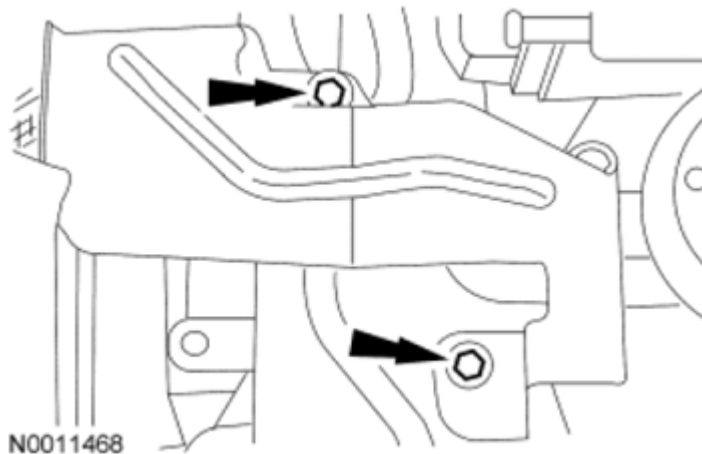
Locating Intake Manifold Shield Mounting Bolt
